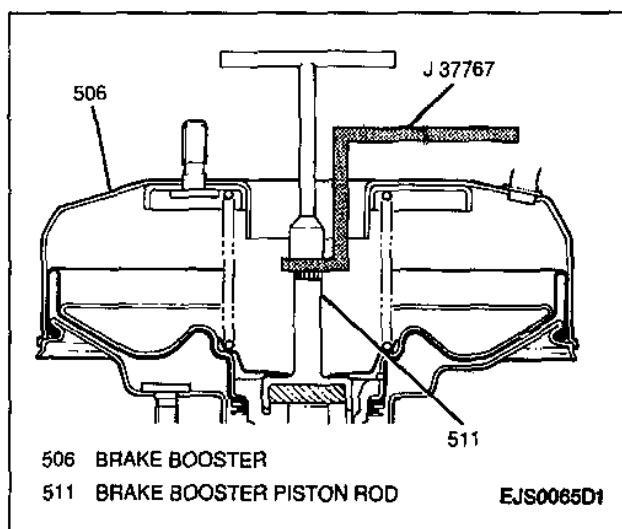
Installing J 37767 Onto Brake Booster Piston Rod
